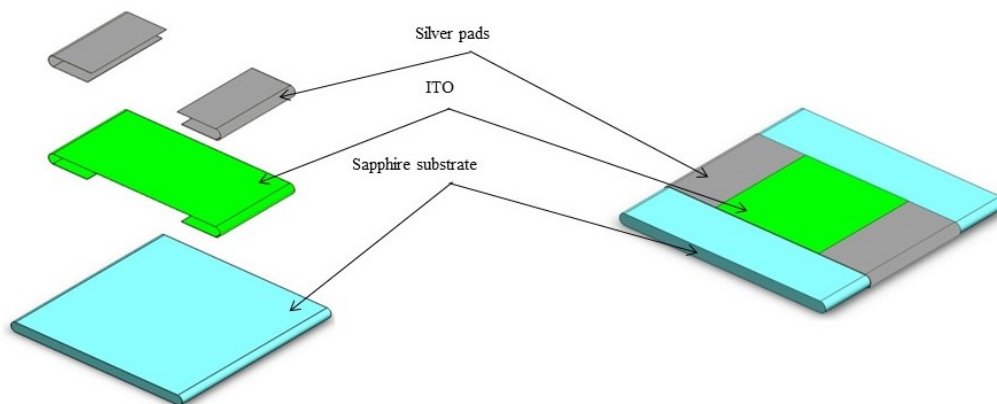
(Left) Exploded view of ITO heater. (Right) View of ITO heater
